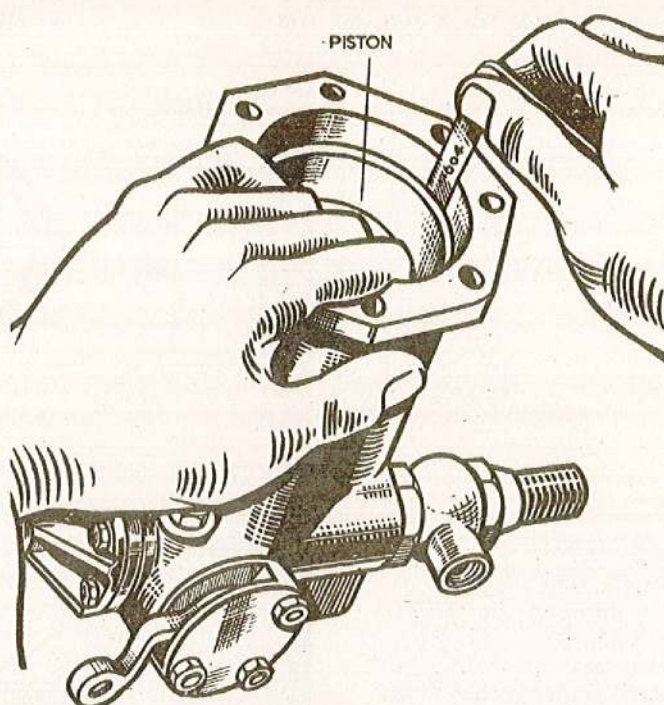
Measurement of 0.004 in. diametral clearance between piston and bore
